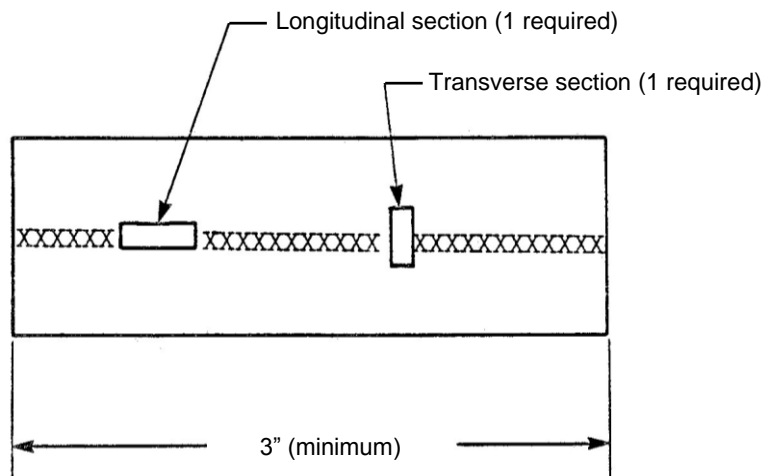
Metallurgical Specimen (Spot and Intermittent Spot Welds)
